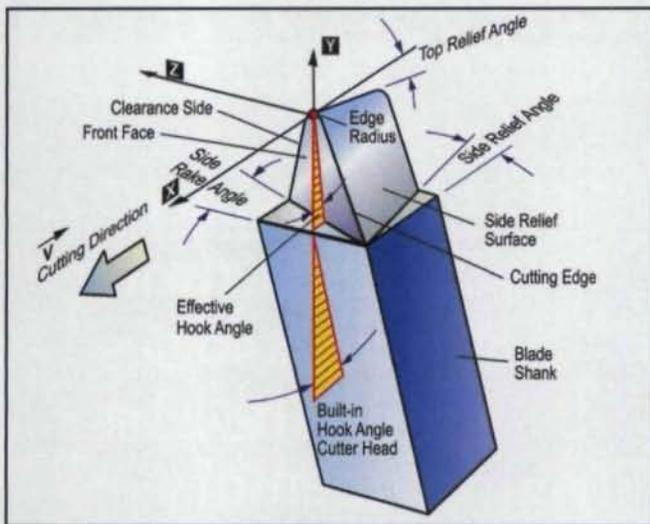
Process-relevant angles on a bevel gear cutting blade.
